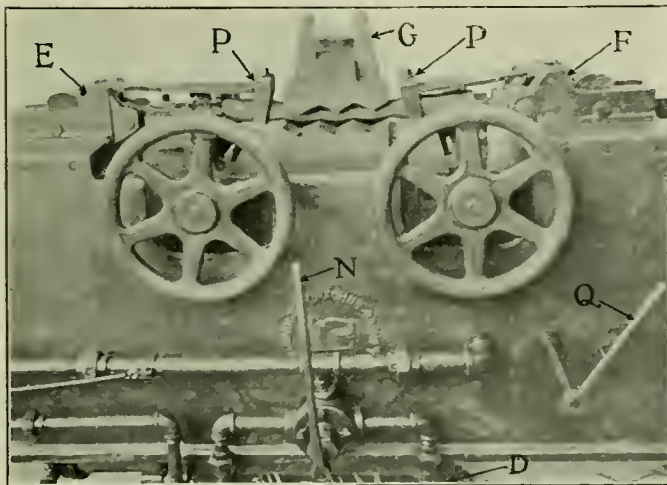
Machine Equipped for Stripping Clamps and Fittings
